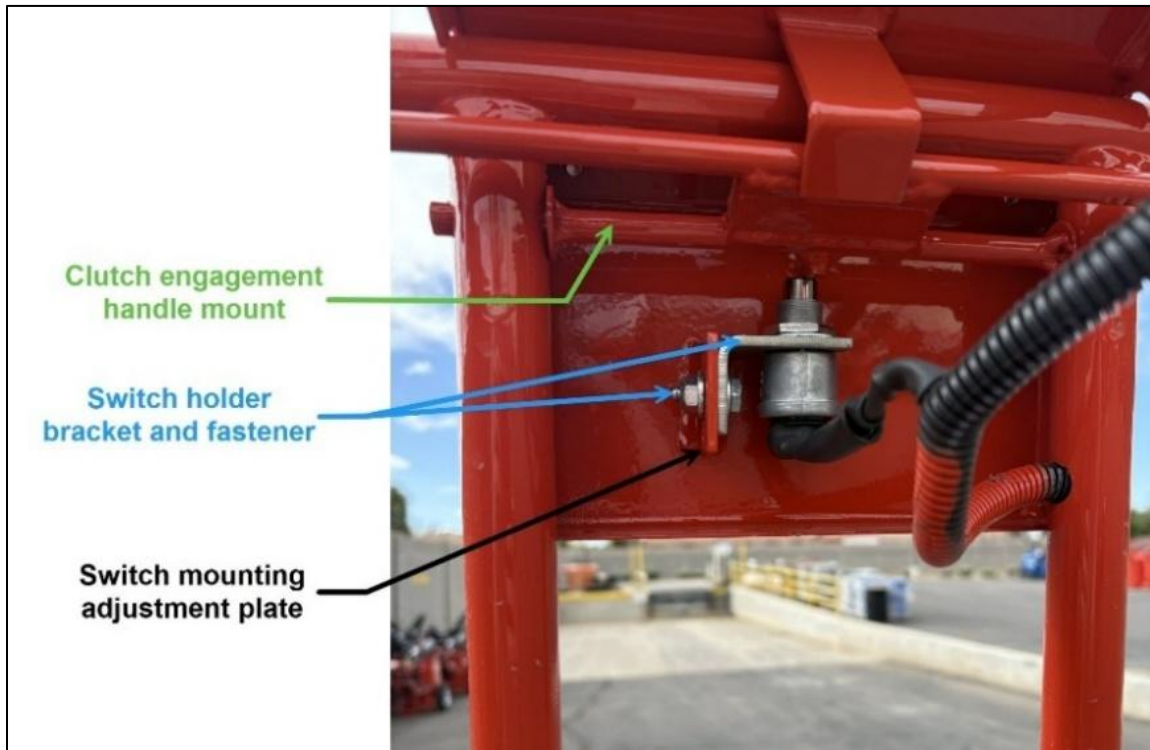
Non SP-Router Clutch Engagement Handle and Switch
